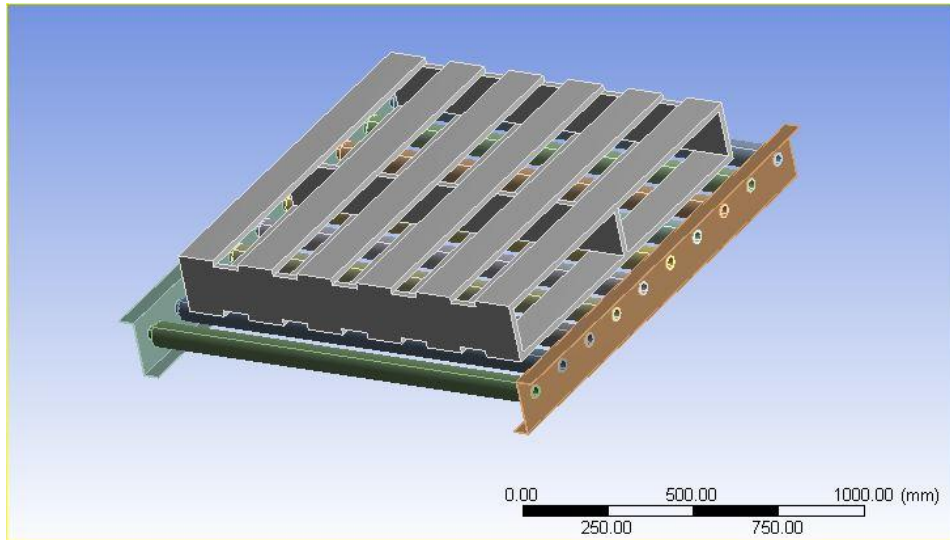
Geometric model of the Assembly of Roller Conveyor System
